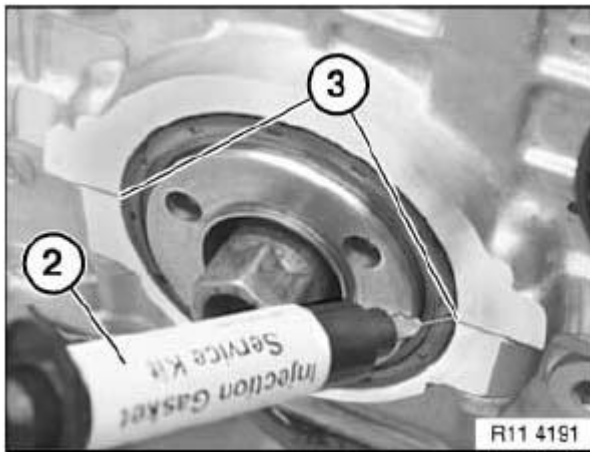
Identifying Radial Shaft Seal Groove And Loctite Injector
